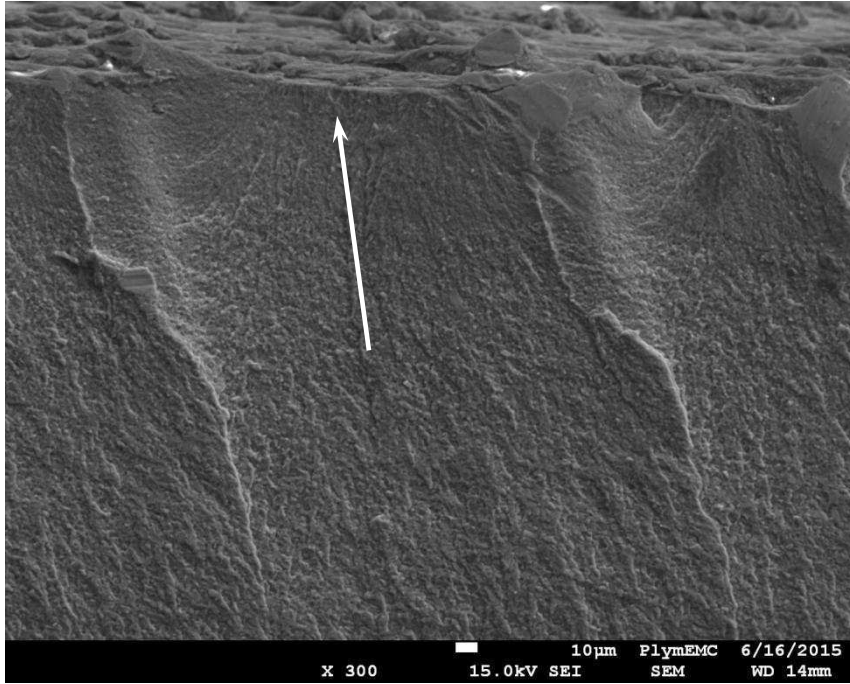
SEM fractograph showing crack initiation (arrow) between surface tool marks in tensile fatigue specimen W121. The small white bar at the bottom of the picture is a 10 μm marker.
